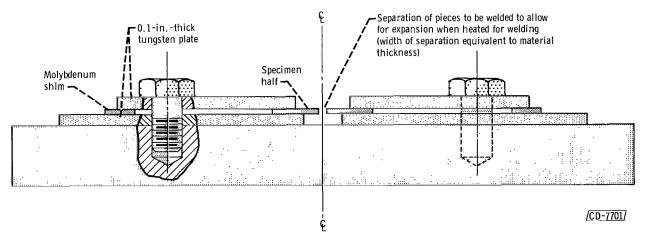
End view of welding fixture (length, 9 in.).
